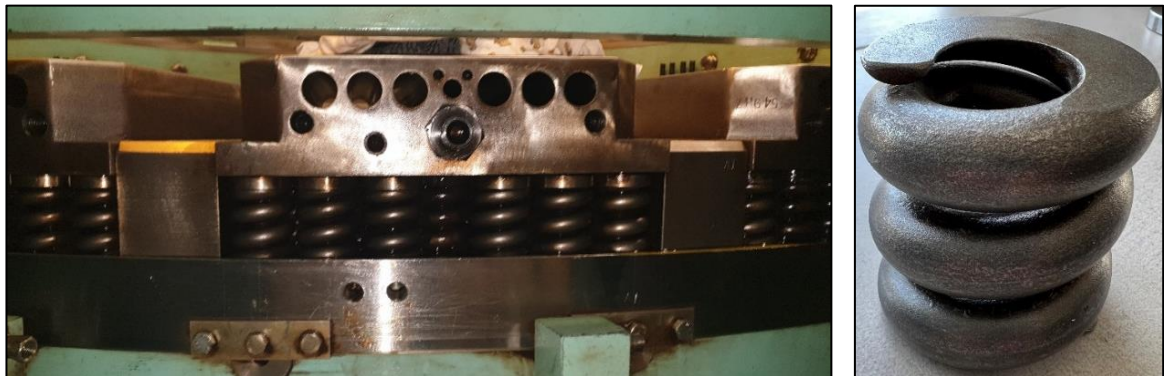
Original Thrust Bearing Springs (as installed) & Disassembled
